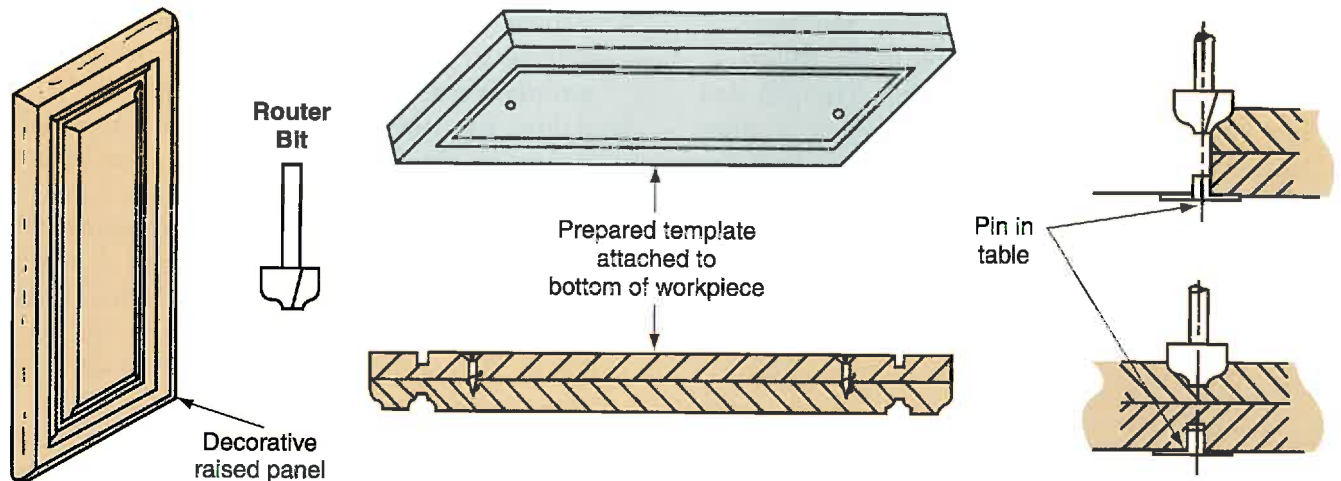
The prepared template for making the raised panel has a groove cut in the bottom. Right—The pin follows along the edge, then in the groove, to complete the panel.
